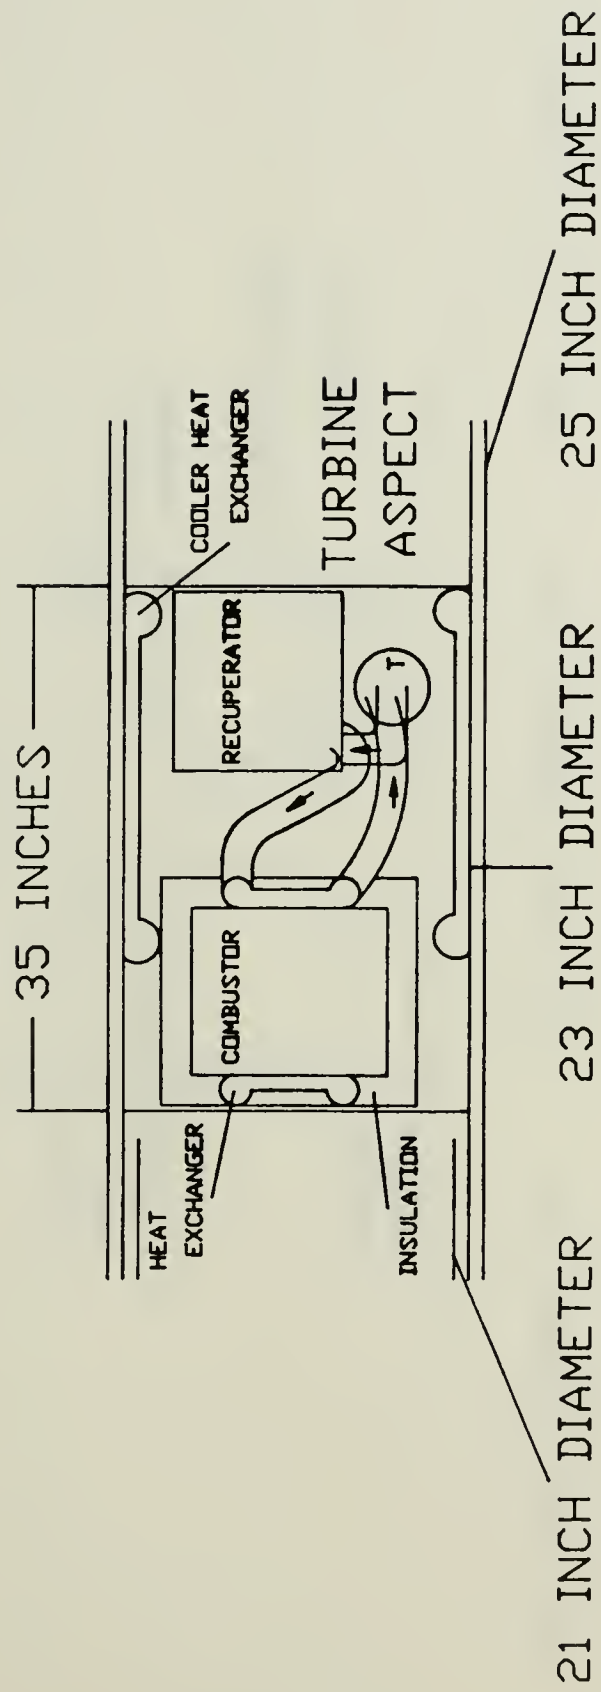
SIDE VIEW OF A 25 INCH DIAMETER VEHICLE
